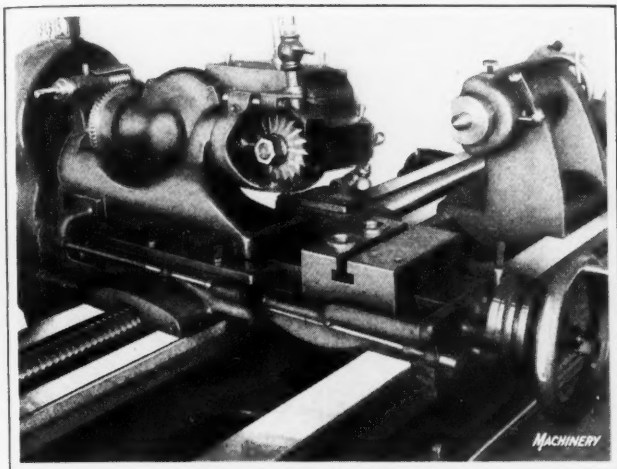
Cutter-head and Cross-slide of the Thread Miller
